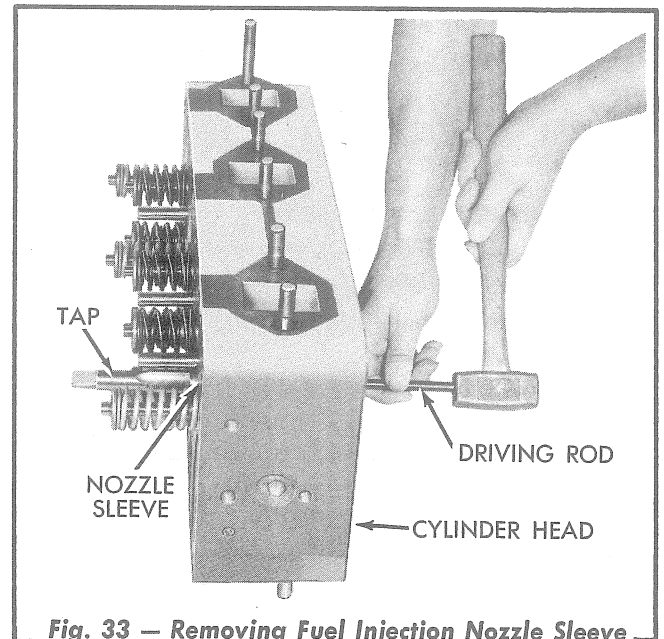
Removing Fuel Injection Nozzle Sleeve (Tractors Serial No. 4001 and Above)
